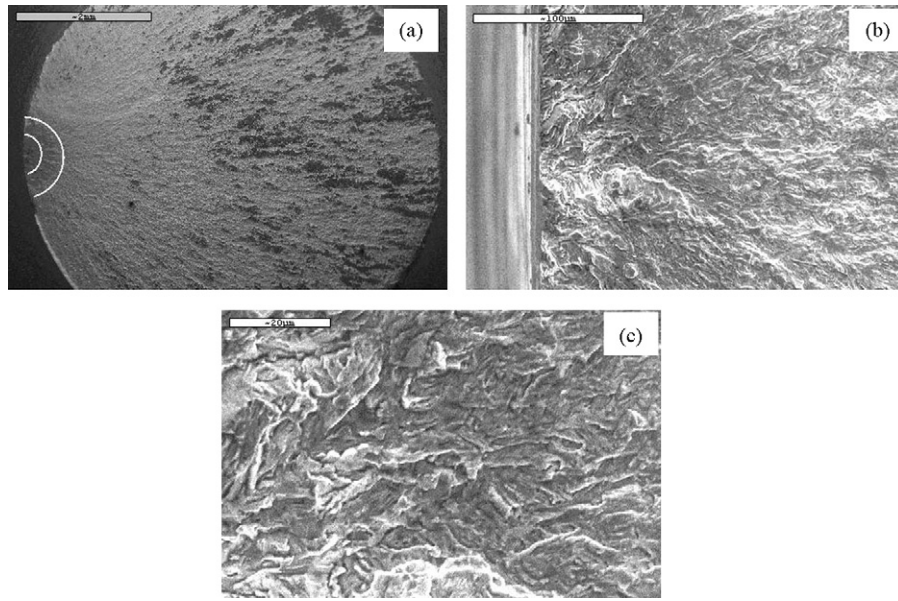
Fractograph of the surface-induced fracture ($R=0.1$, $\sigma_{\max}=1500$ MPa, $N=5.53 \times 10^4$ cycles). (a) Macro-image of fracture surface; (b) macro-image of surface crack origin; (c) high-magnification photograph near the surface crack origin.
